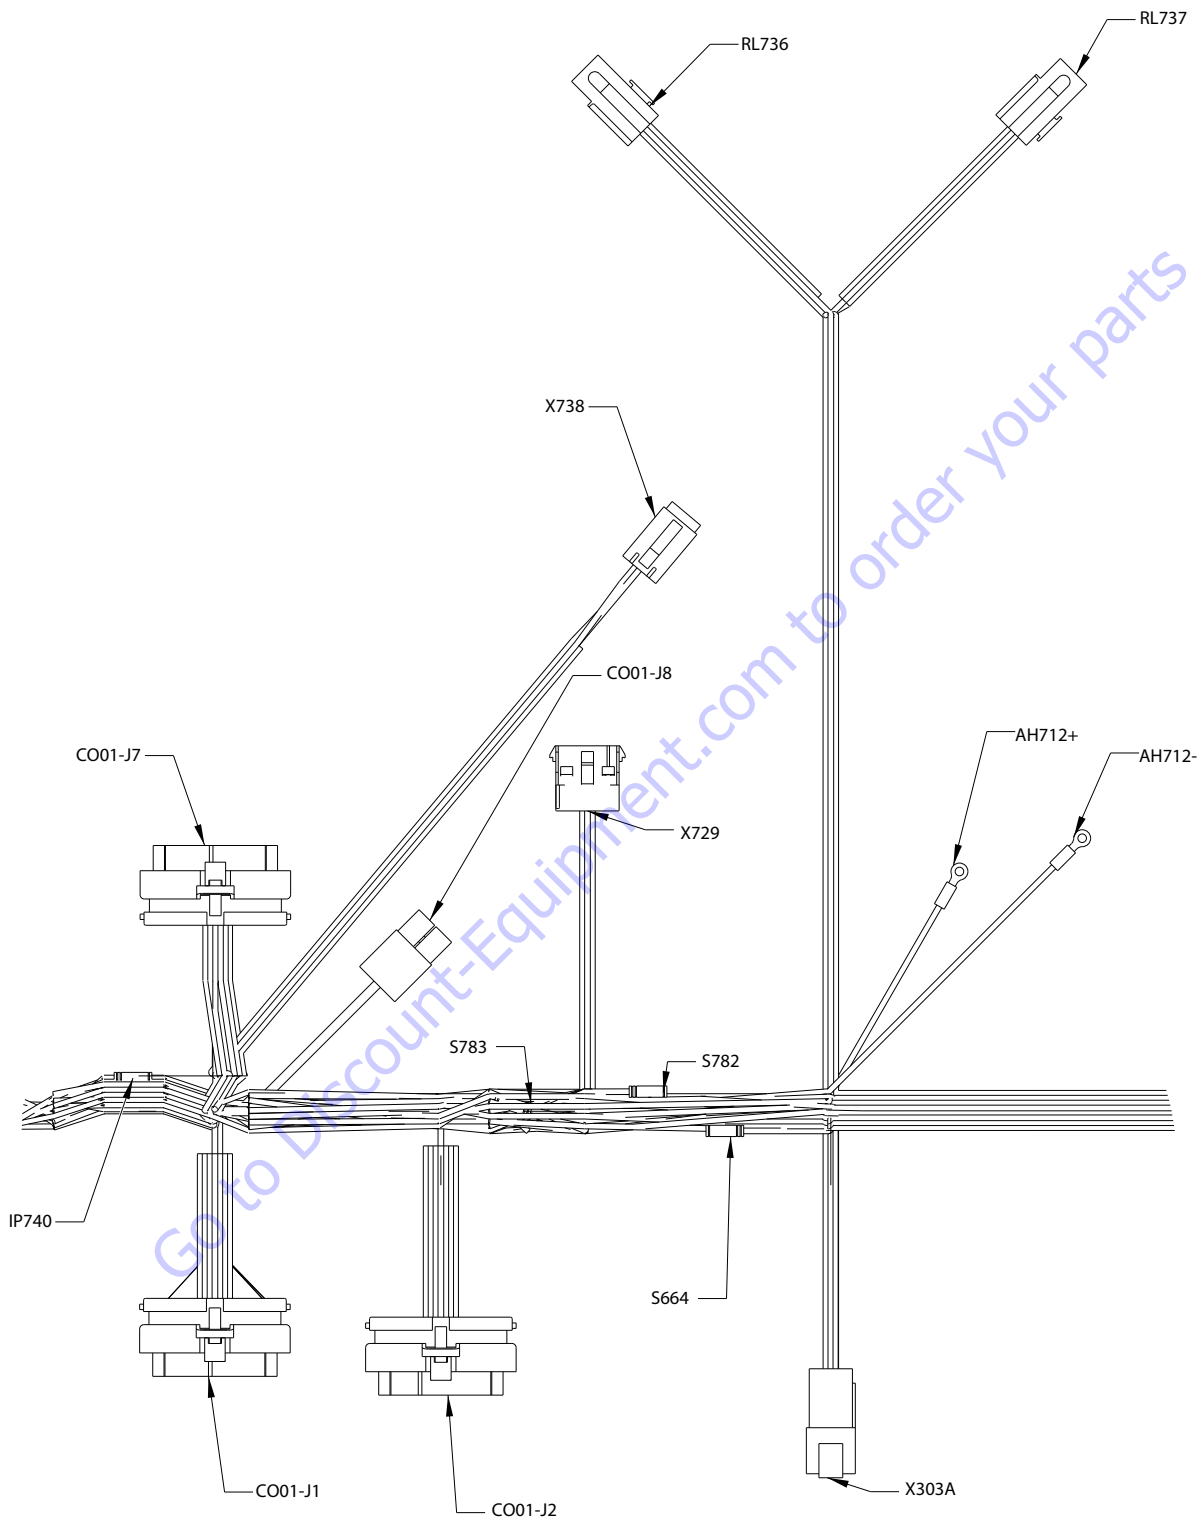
Platform Box Harness - Sheet 3 of 6
